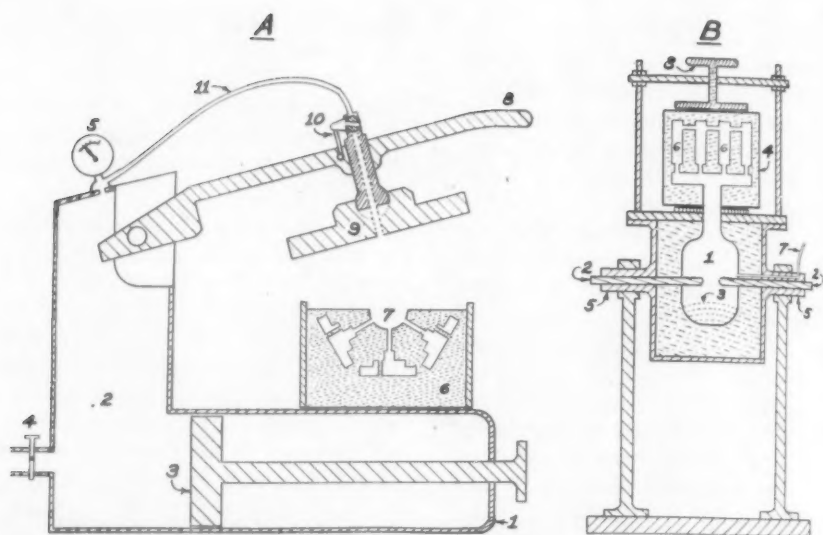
A—LINE SKETCH OF PRESSURE TYPE CASTING MACHINE. 1—MACHINE BASE. 2—AIR PRESSURE TANK. 3—PISTON PUMP. 4—COMPRESSED AIR VALVE. 5—PRESSURE GAGE. 6—MOLD. 7—CRUCIBLE. 8—HANDLE. 9—HEAD. 10—AIR VALVE MECHANISM. 11—AIR HOSE. B—ARC FURNACE PRESSURE CASTING MACHINE. 1—ENCLOSED ARC FURNACE. 2—ELECTRODES. 3—MOLTEN METAL. 4—MOLD. 5—TRUNNIONS FOR INVERTING ASSEMBLY. 6—MOLD CAVITY. 7—AIR PRESSURE LINE. 8—MOLD CLAMP.
